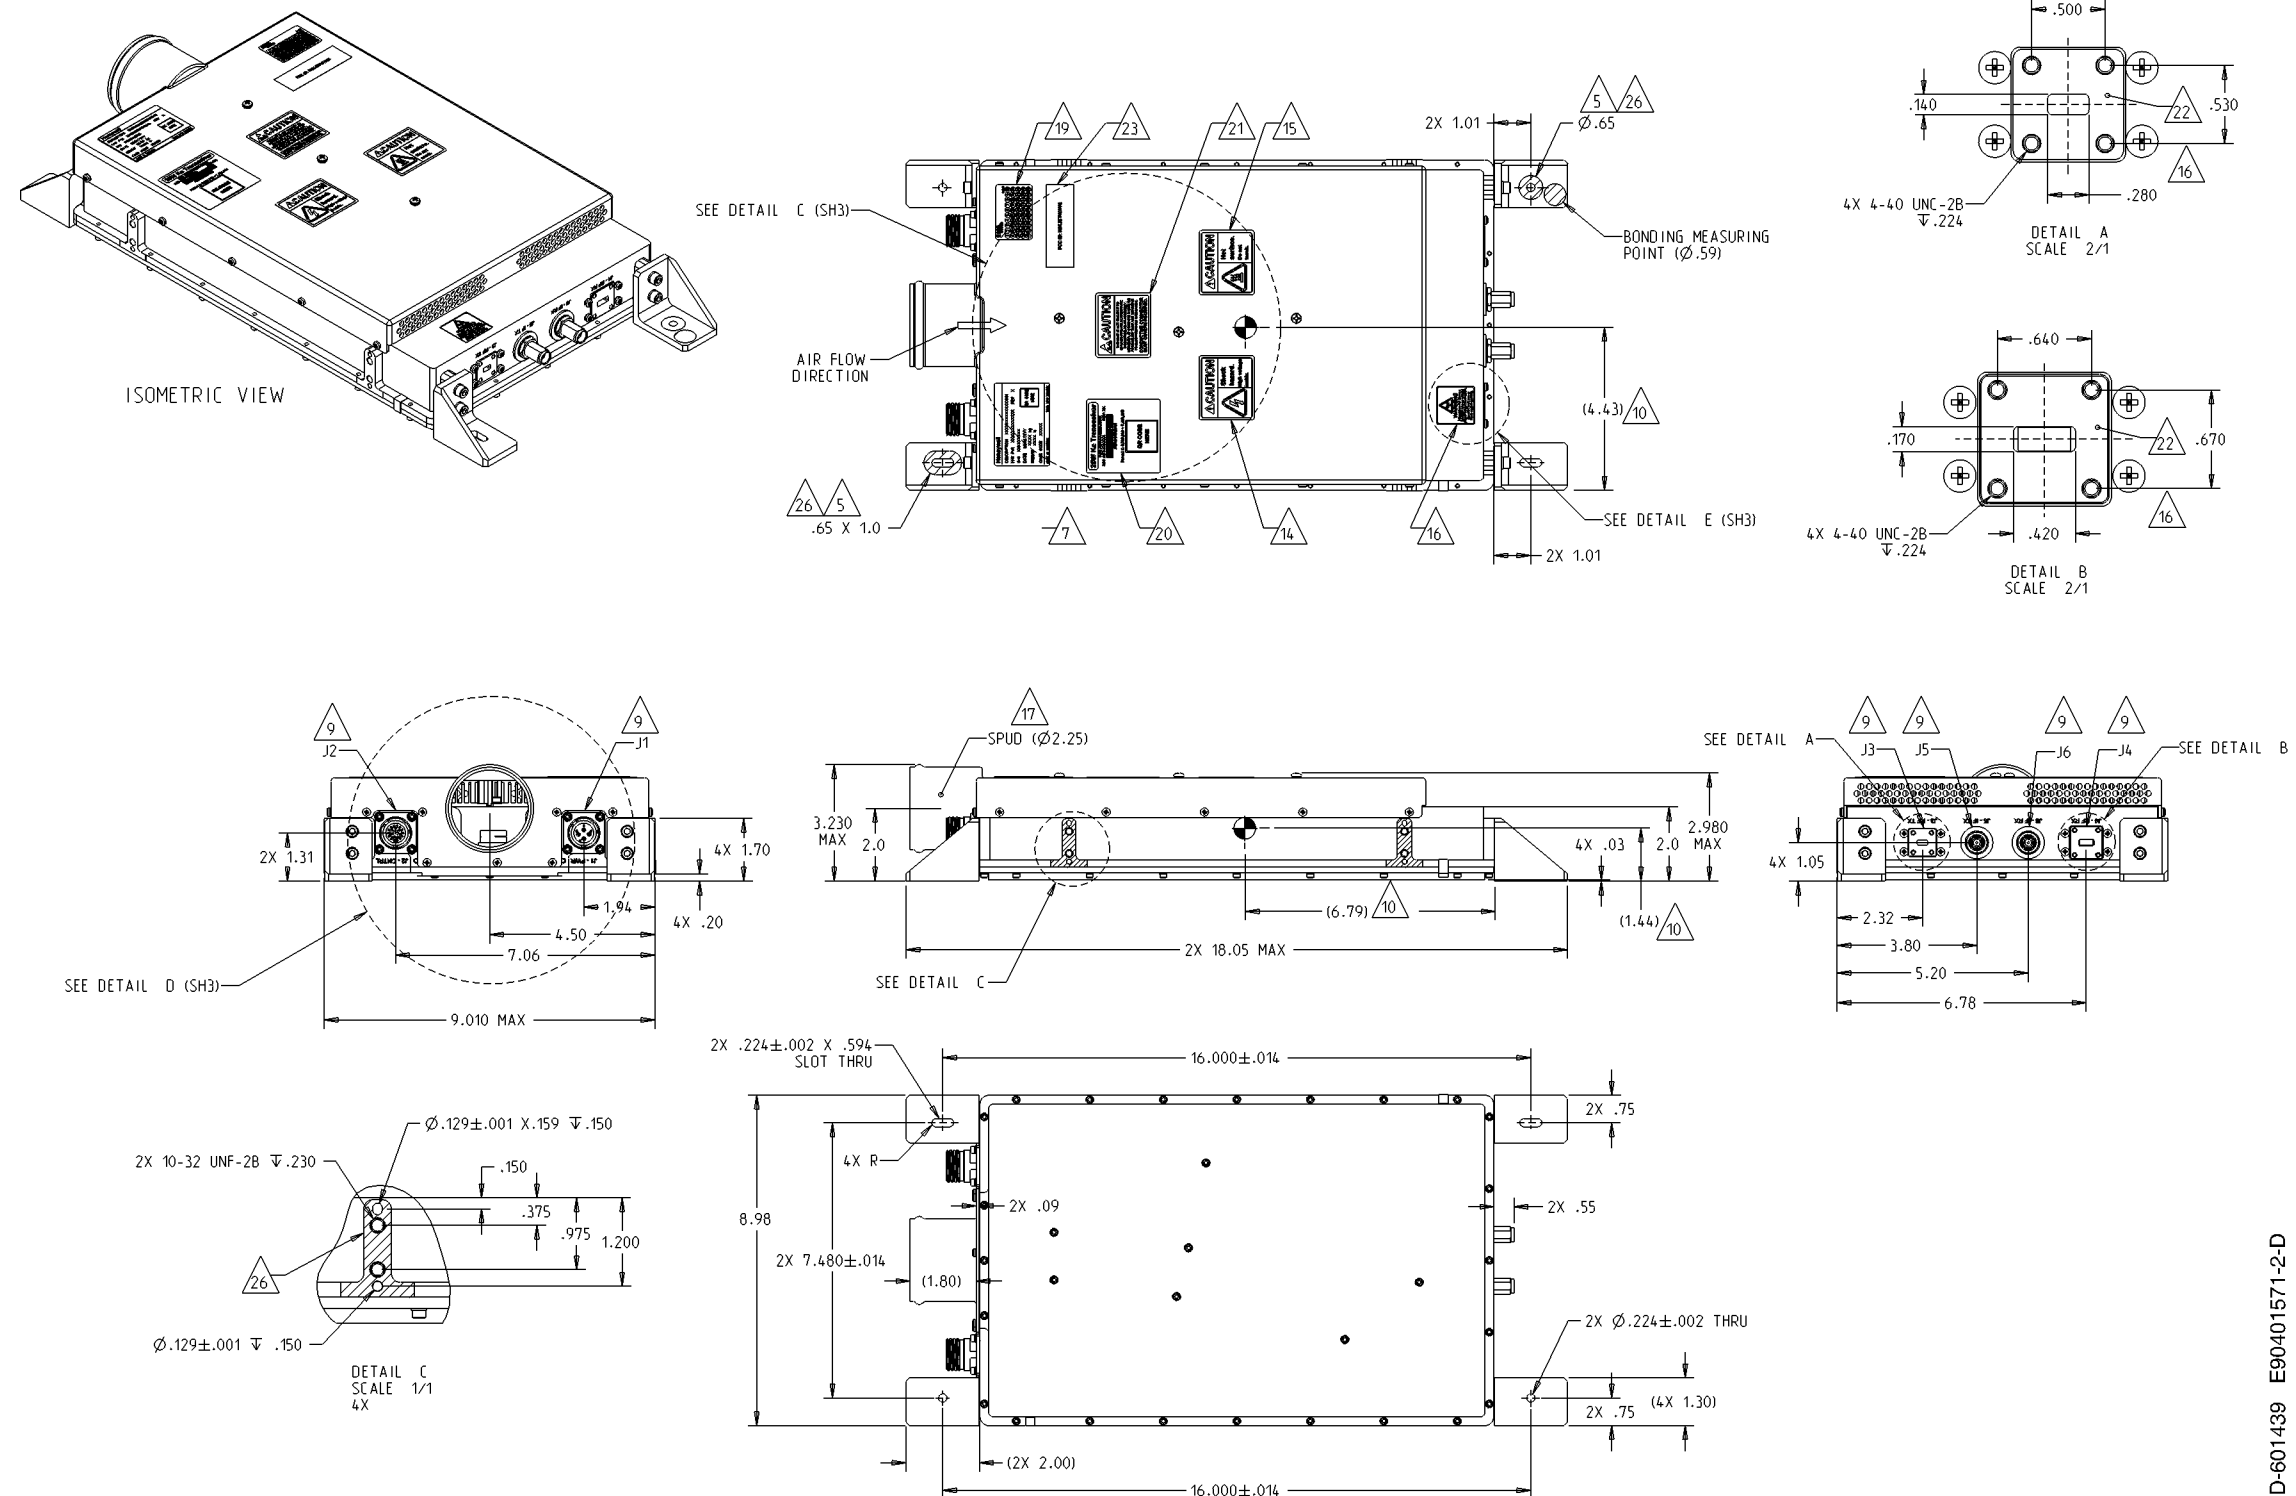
(Sheet 2 of 3) KRFU, Forced Air Cooled, Outline and Installation Drawing (90401571, REV D)
